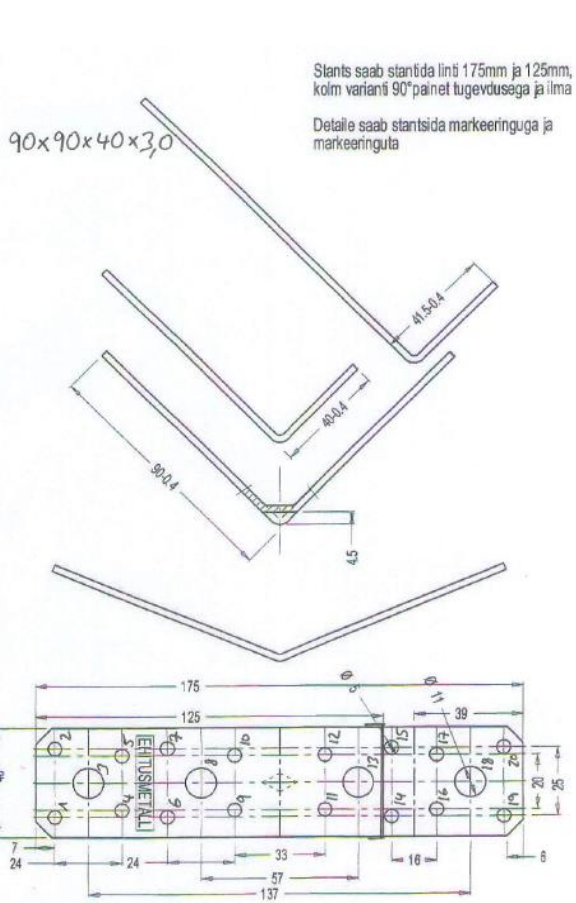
Dimensions of angle bracket 90x90x40x3,0
